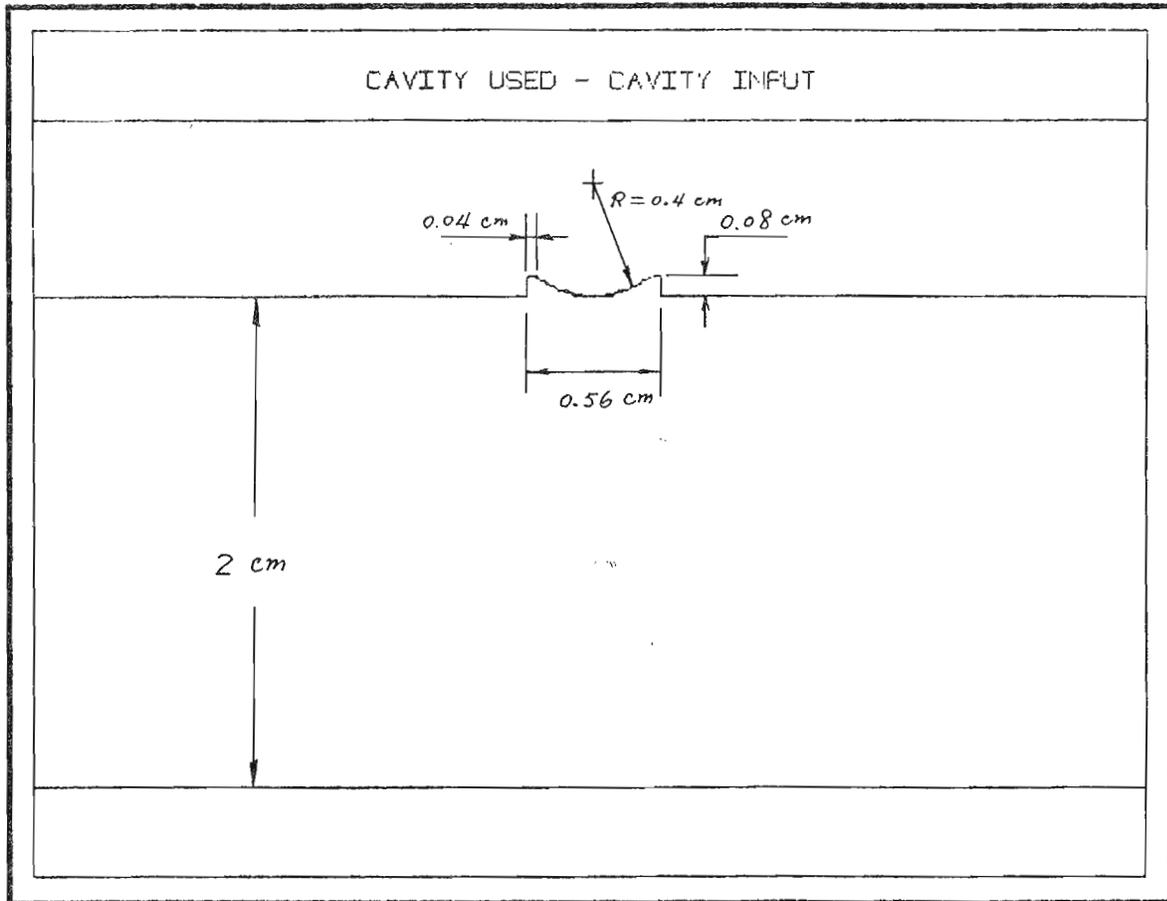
The structure of a welded joint. The dimensions are taken from a sample weldment made by Ferranti Sciaky.
